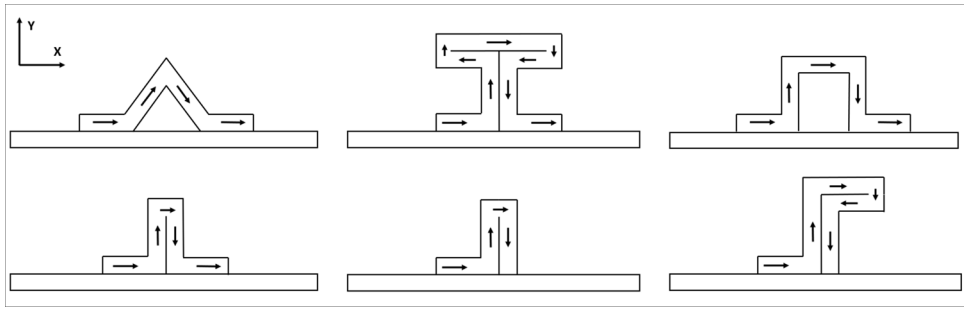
Typical elements used to strengthen the semi-monocoque structure. The arrows indicate the printing direction. The elements are fused into the outer shell with an overlap.
